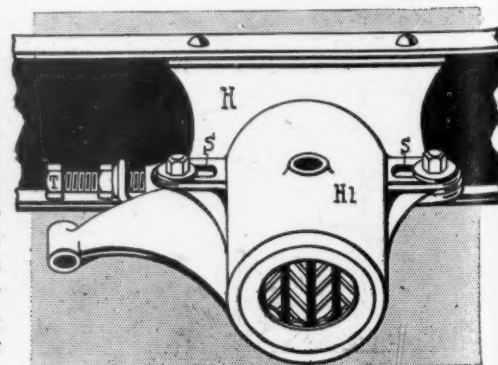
LAMBERT JACKSHAFT SUPPORT
